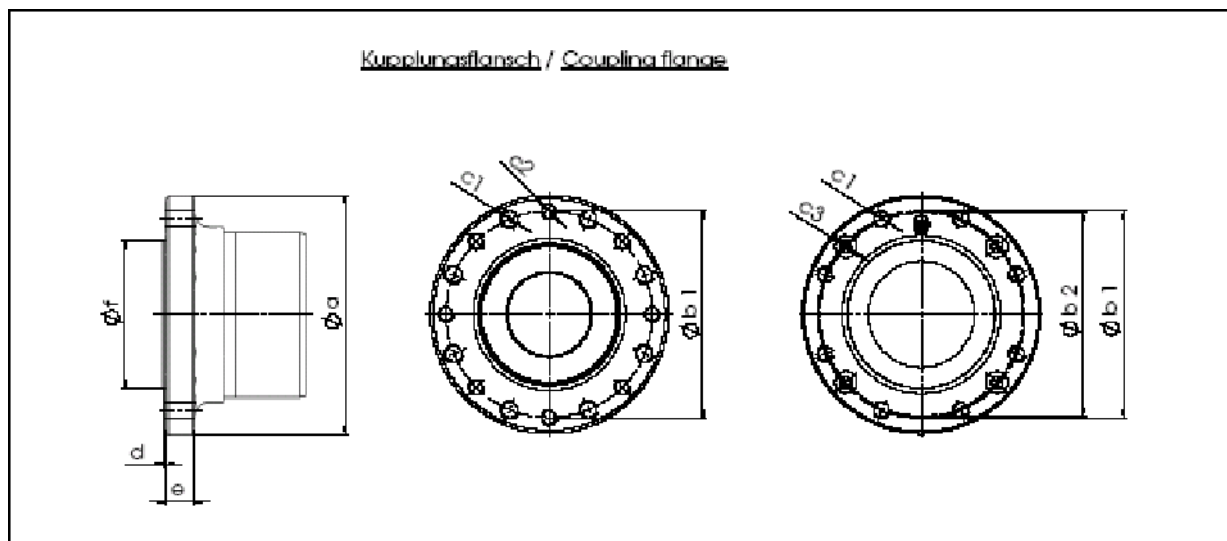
Connecting dimension of coupling flange (partly prepared for bolts acc. DIN 15451)
